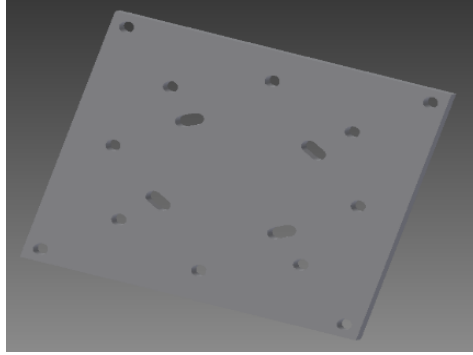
Fixed base plate. CAD draft of the fixed base plate in the mechanical system.
